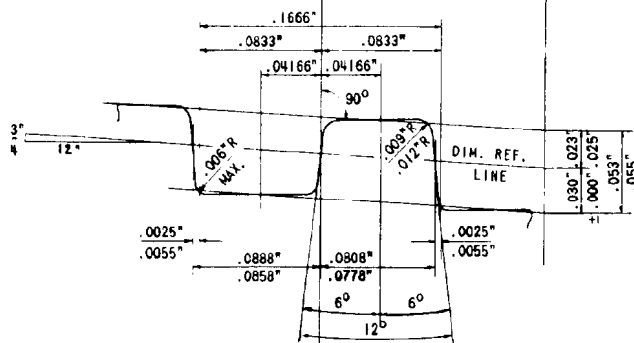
Box-and-pin entrance threads, extreme-line casing joint sizes 8⁵/₈ through 10³/₄ in.
